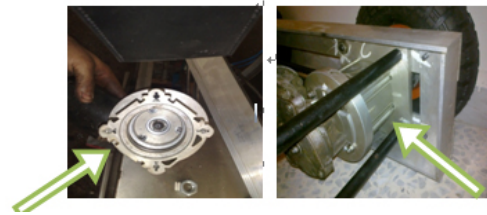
The assembly of the motor engaged by the boite and the wheelchair
